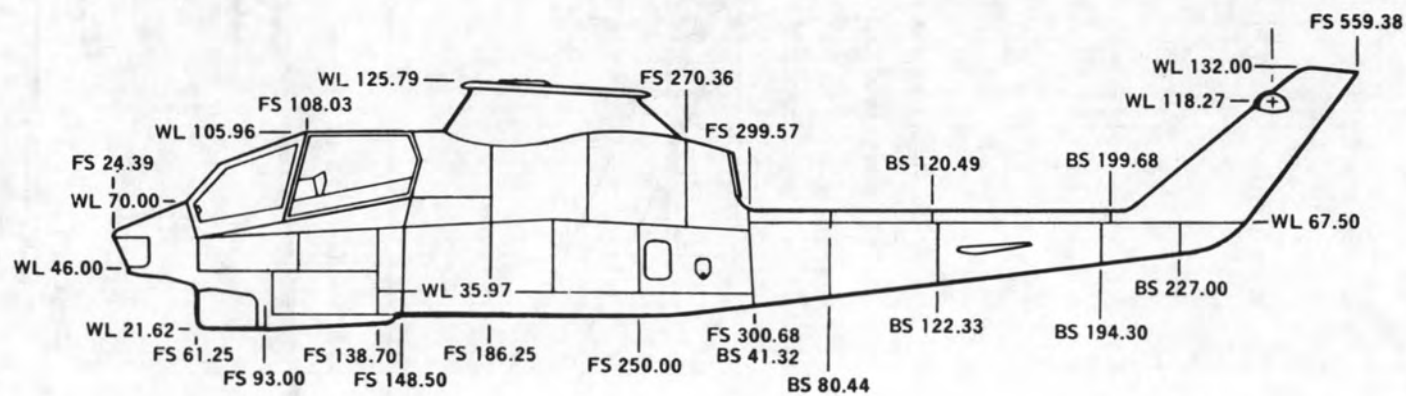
Principal Dimensions — Airframe (Sheet 2 of 2)
